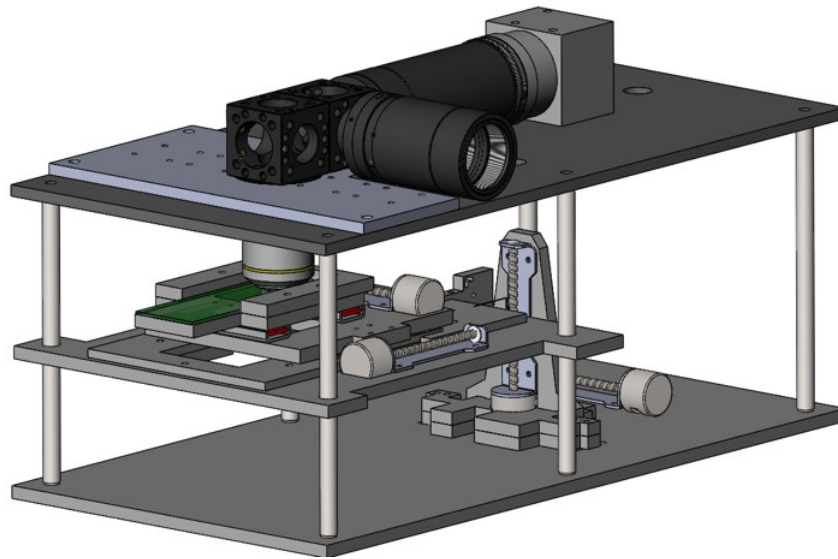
CAD Design of z-axis screw mechanism prototype
